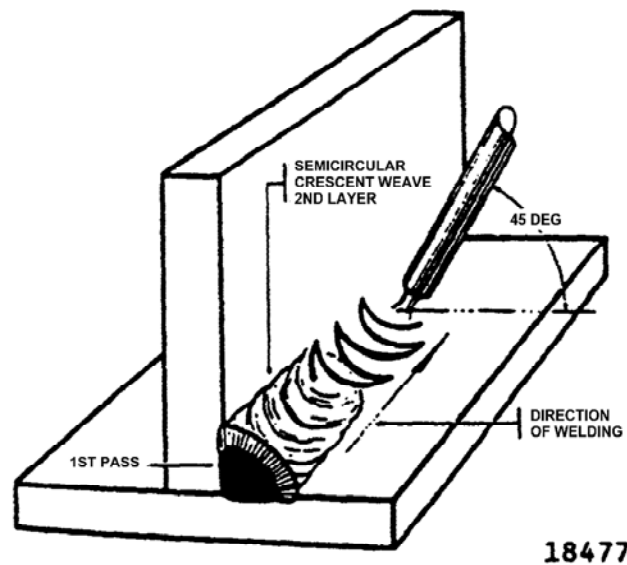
Weave Motion for Multipass Fillet Weld
